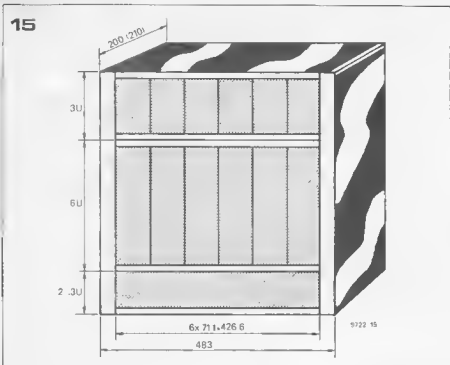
A case containing one 6U and one 3U rack will accommodate six large and six small Formant modules. It can be useful to add a 2U or 3U bottom panel (using a larger case!), behind which amplifiers etc. can be mounted.
